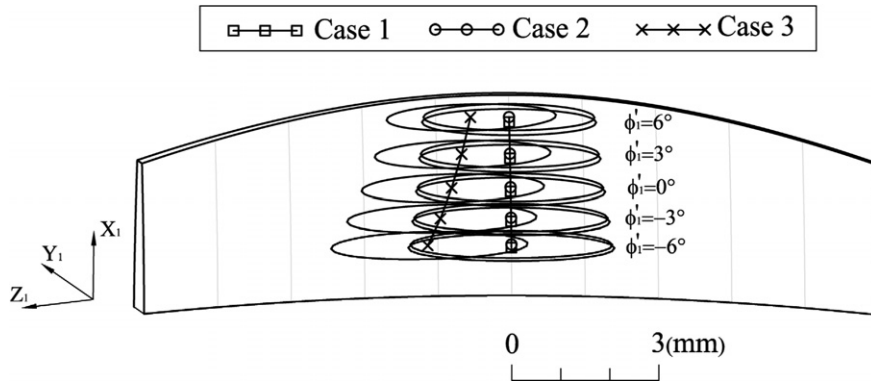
Contact patterns of spherical gear set with convex pinion and concave gear.
